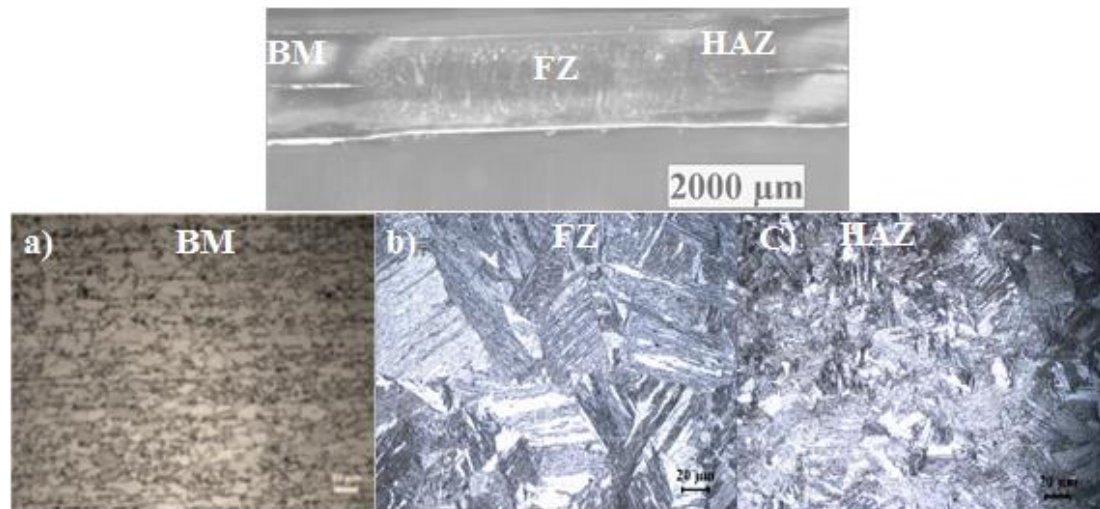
2. The weld zone profile and its microstructures of DP600 weldment joined with 3.5 Bar electrode force with 4kA welding current. a) base metal (BM), b) Heat Affect Zone (HAZ), c) weld nugget (FZ).
